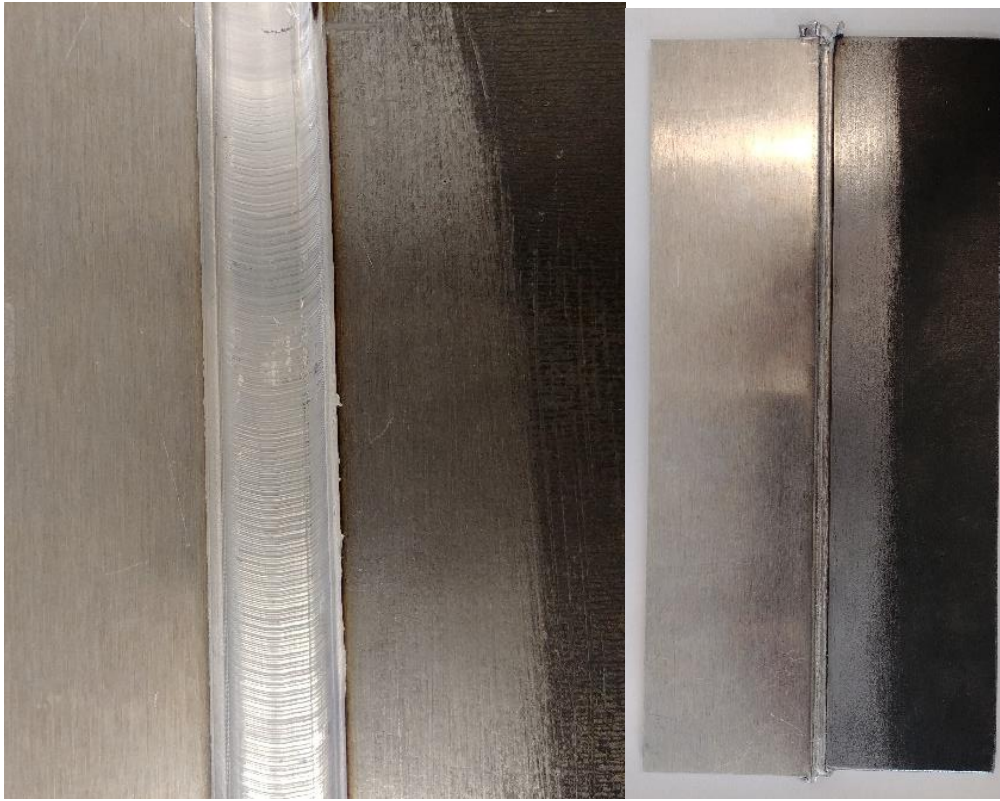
HYB dissimilar welded plates On the right the bottom of a plate. On the left a detail of the filler material. Aluminium on left side, steel on the right side.
